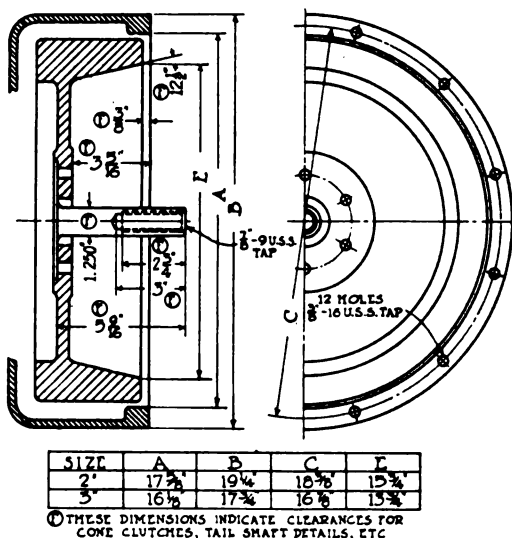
Clearances for cone clutches and the details of tail shaft construction are indicated by this drawing; as well as the number, size and location of holes and the threads of those which are tapped. The principal dimensions are given in the table
